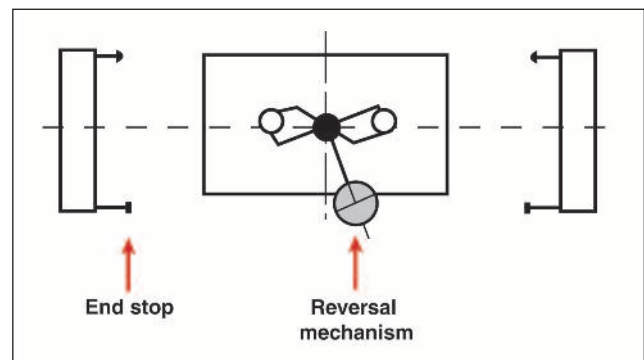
End stops and reversal mechanism configured for routine automatic reversal.
